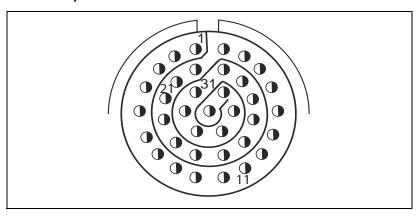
MIL-DTL-38999 Series III TV Shell/Insert 15-35 (socket)
